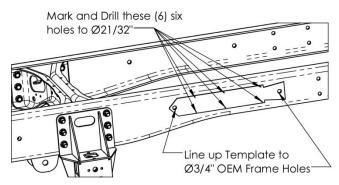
Location of Drilling Template on Driver Side Frame (Steel Leaf Spring Conversion)
